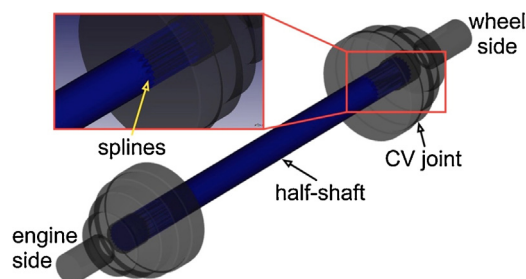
Assembly of the half-shaft and the CV joints. In detail, the connection of the half-shaft with the CV joint on the wheel side.
